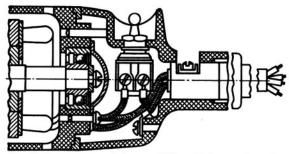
Latest design of switch arrangement for small die grinders and sanders. The toggle-operated switch unit is mounted in a dusttight compartment and a dust seal is provided where the toggle comes through the case. This type of switch does not have a release arrangement that opens it automatically.
